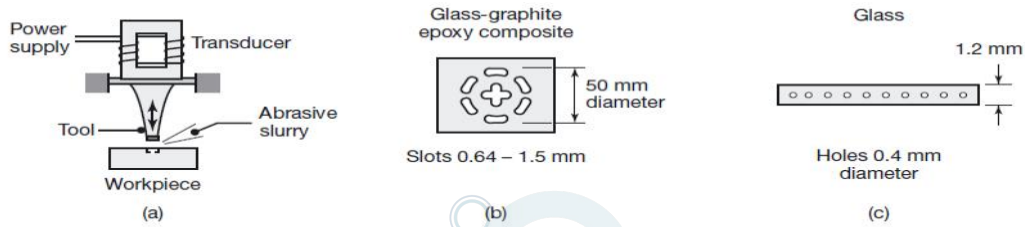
(a) Schematic illustration of the ultrasonic-machining process; material is removed through microchipping and erosion. (b) and (c) Typical examples of cavities produced by ultrasonic machining. Note the dimensions of cut and the types of workpiece materials.
